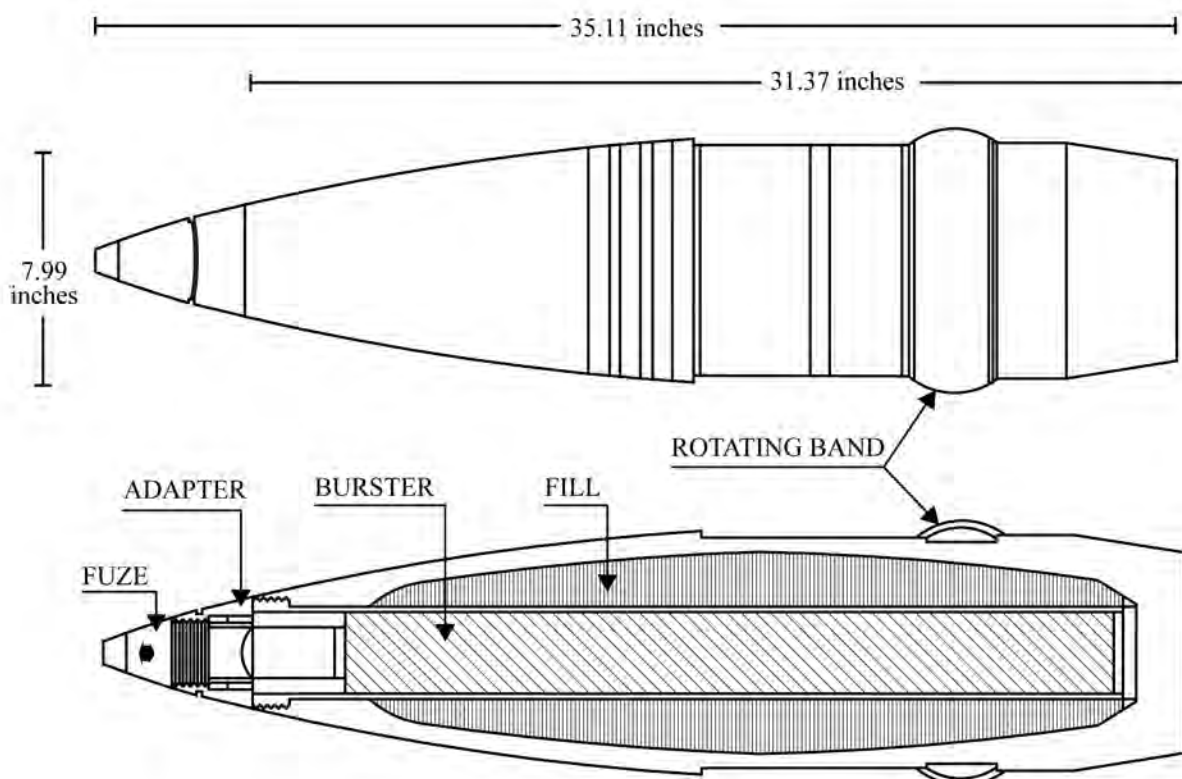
Projectile, 8-inch, Howitzer, M426 - Line Drawing
